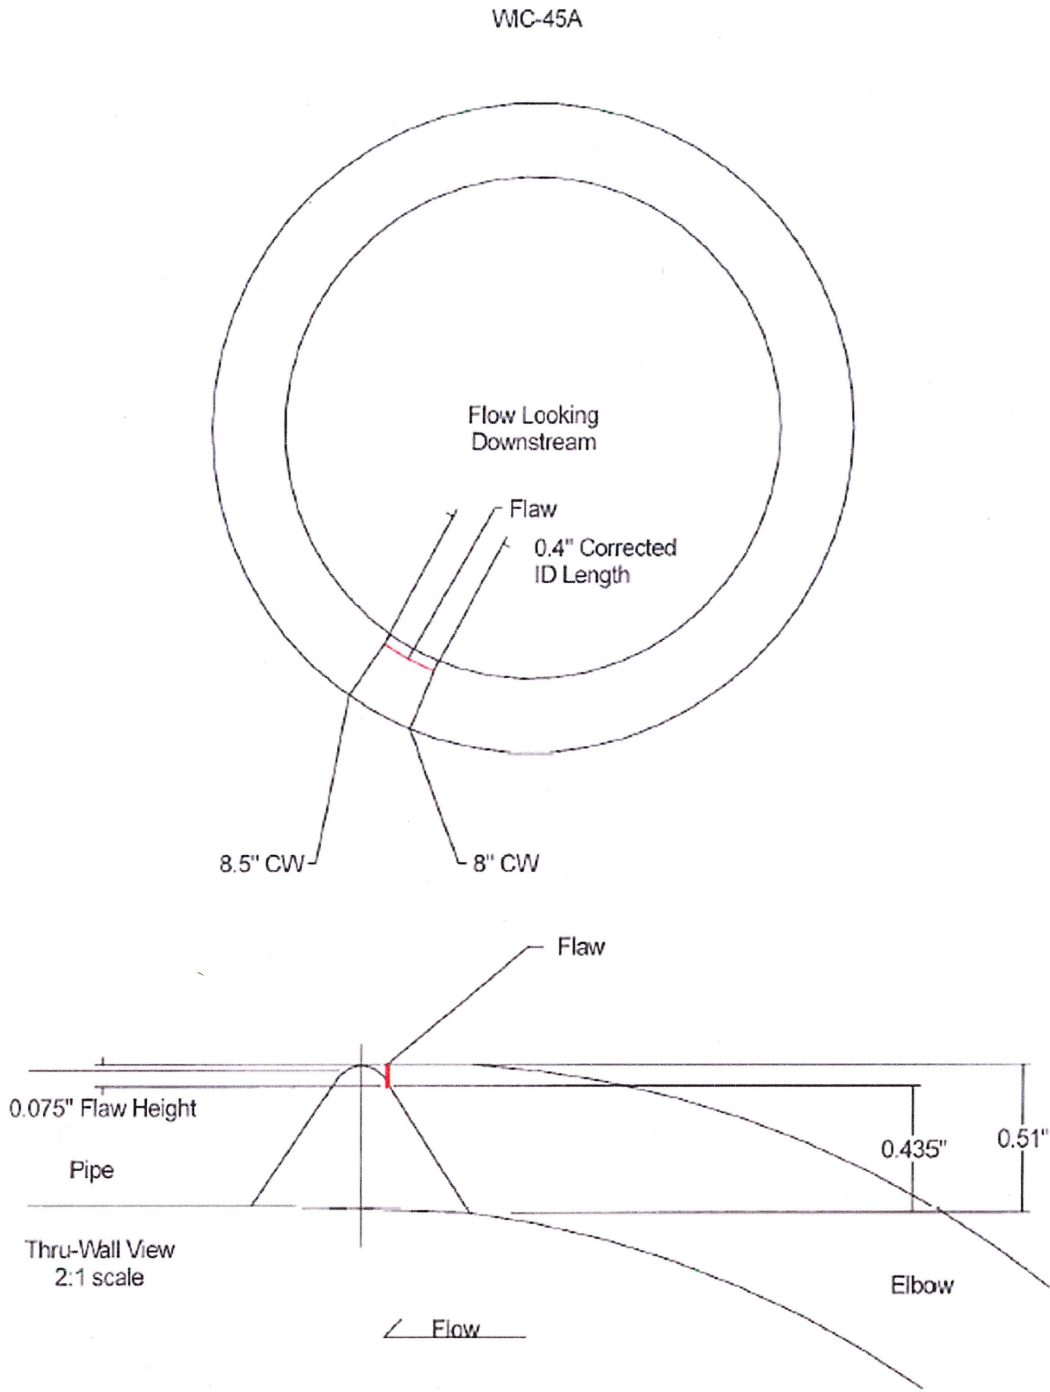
Isometric Drawing of the Charging Pump 2-1 Line Weldment WIC-45A
